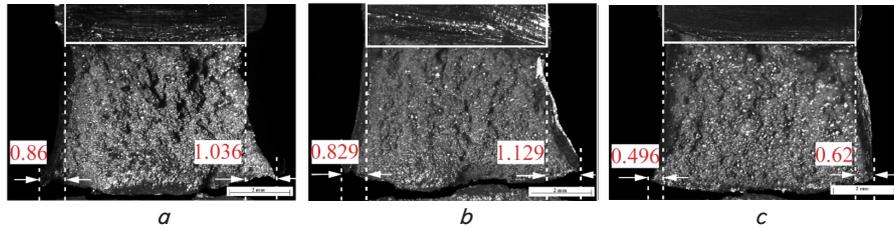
Surface fracture of impact test specimen: *a* – 1900; *b* – 2700; *c* – 3500
